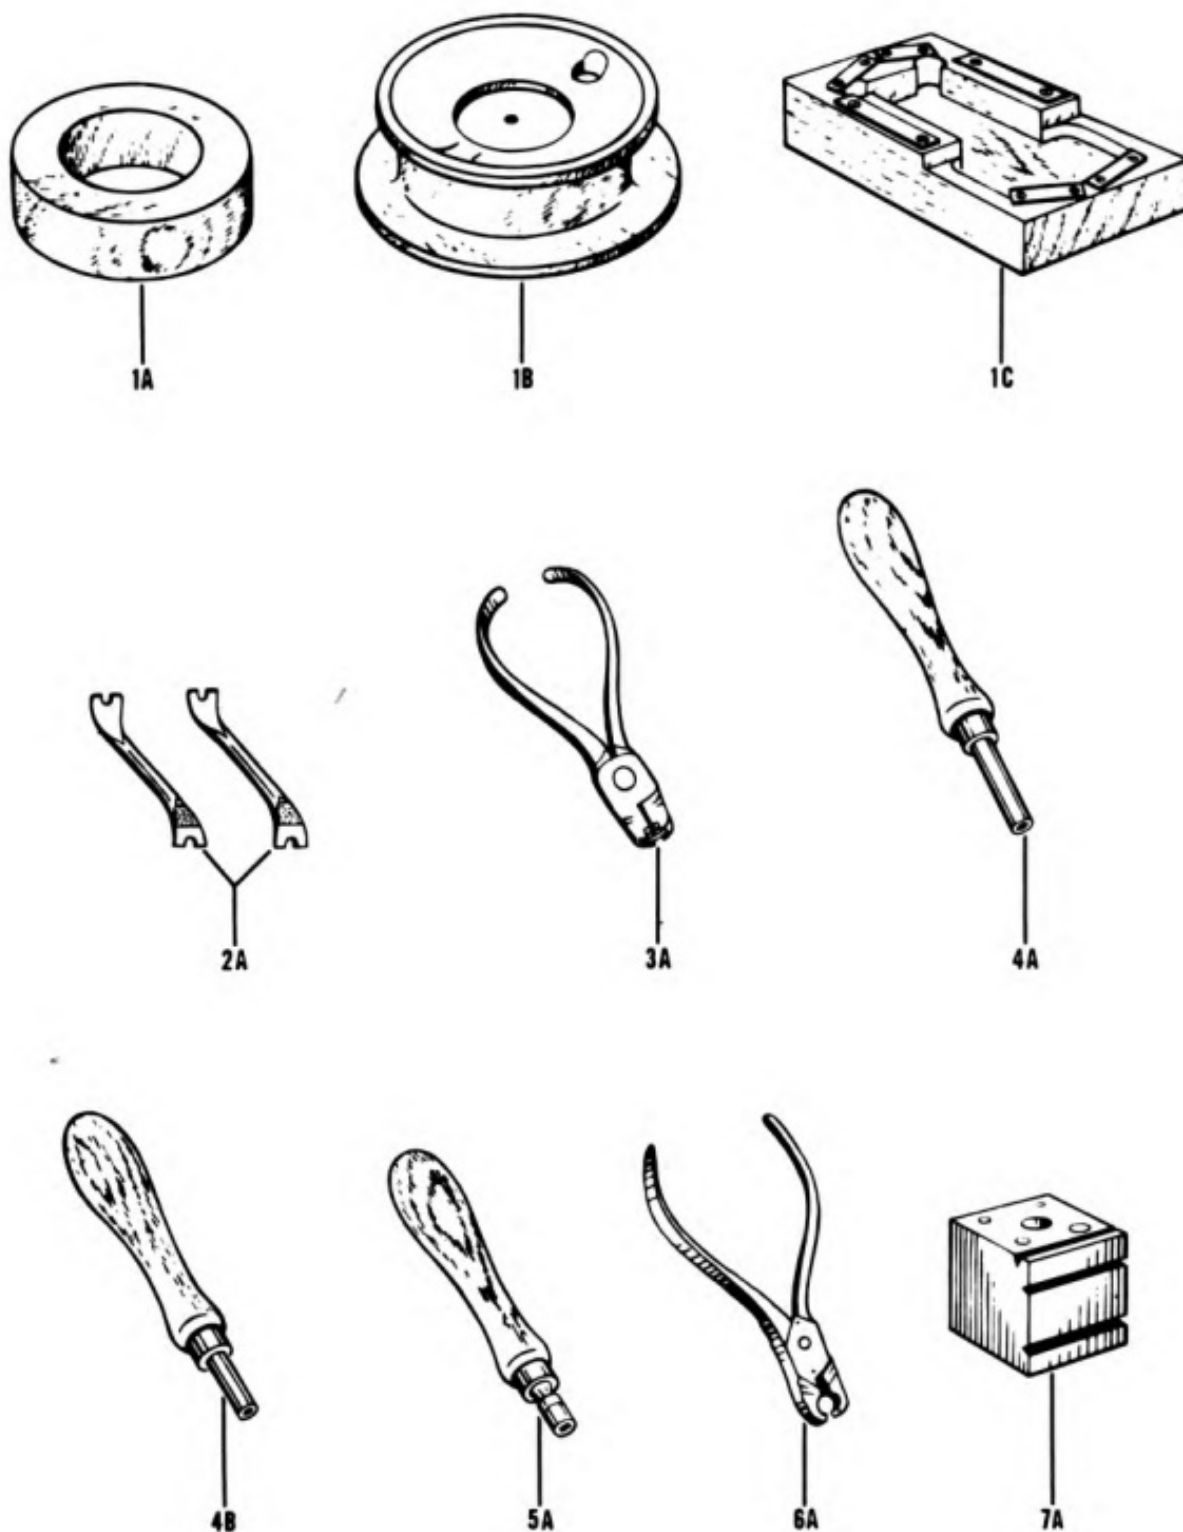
U.S. Navy Clock Special Tools and Fixtures
